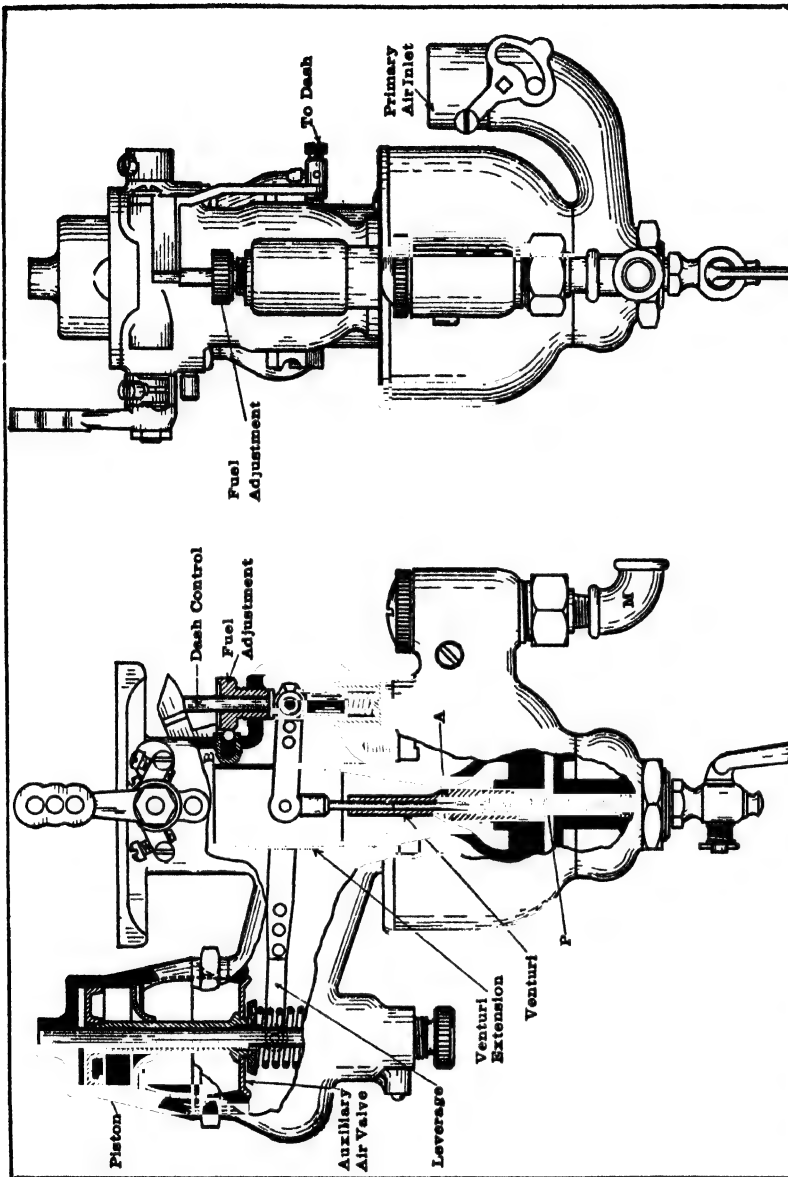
Early Model Schebler Carburetor with Metering Valve and Venturi. Note Mechanical Connection Between Auxiliary Air Valve and Fuel Regulating Needle. This Carburetor was used on Some Pre-War Engines.
